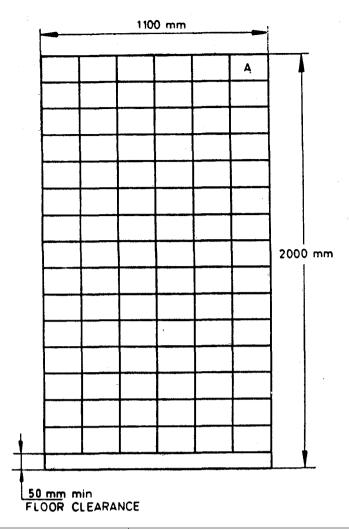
SAFE DEPOSIT LOCKER CABINET TYPE 1, 75 LOCKERS
